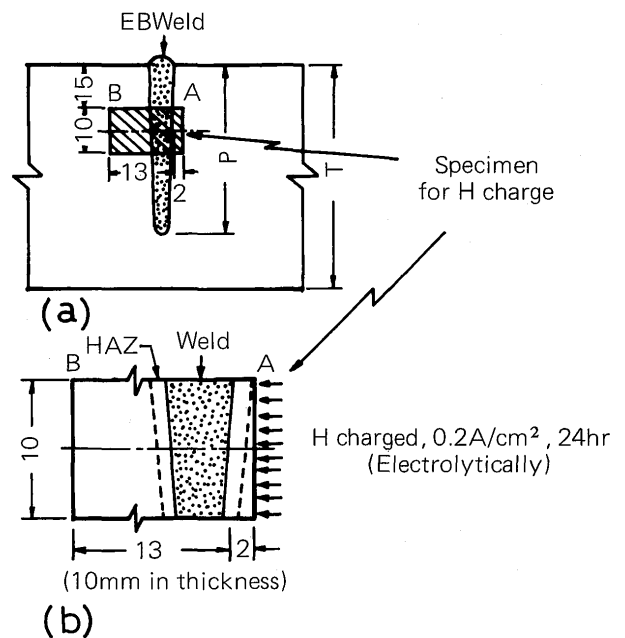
Specimen size and process for hydrogen charge of EBW weldments
